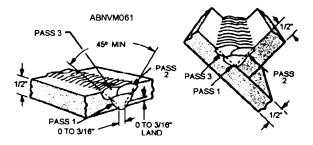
Joint design and weld pass sequence flat-position multipass butt welds in aluminum plate.
